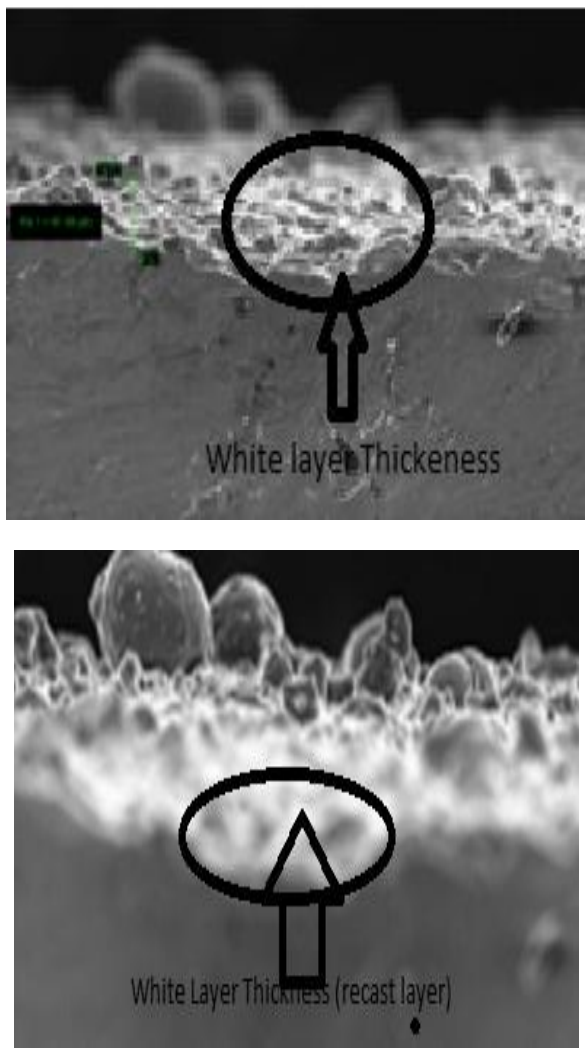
White layer SEM image shown in a Machining surface of the Machining Samples
